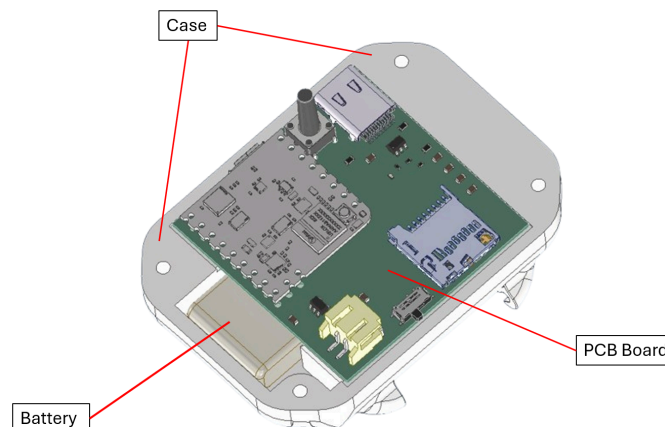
Assembled CAD model of case, battery and PCB board
